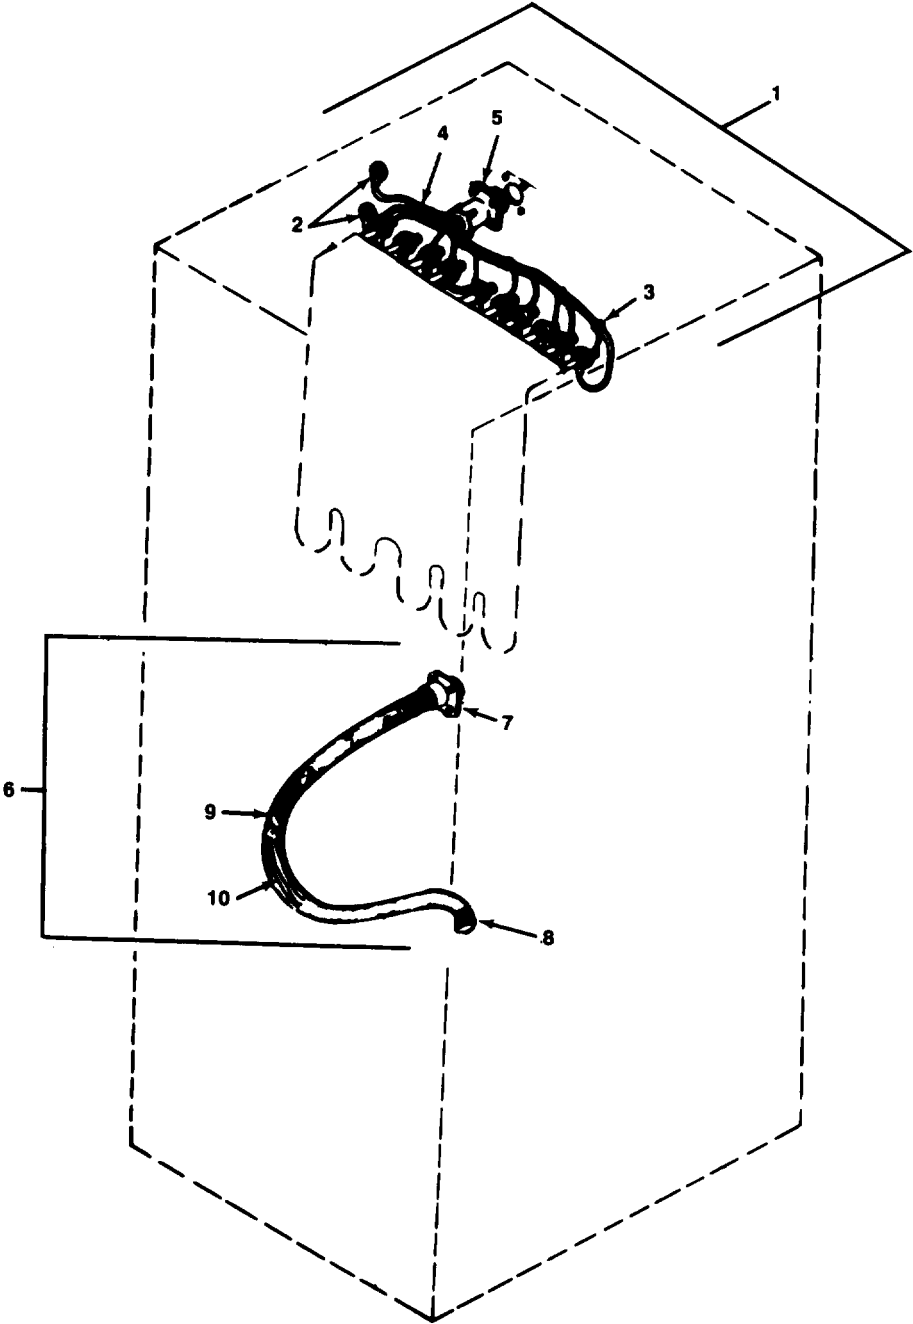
Heater and RFI Filter Wire Harness Assemblies.
